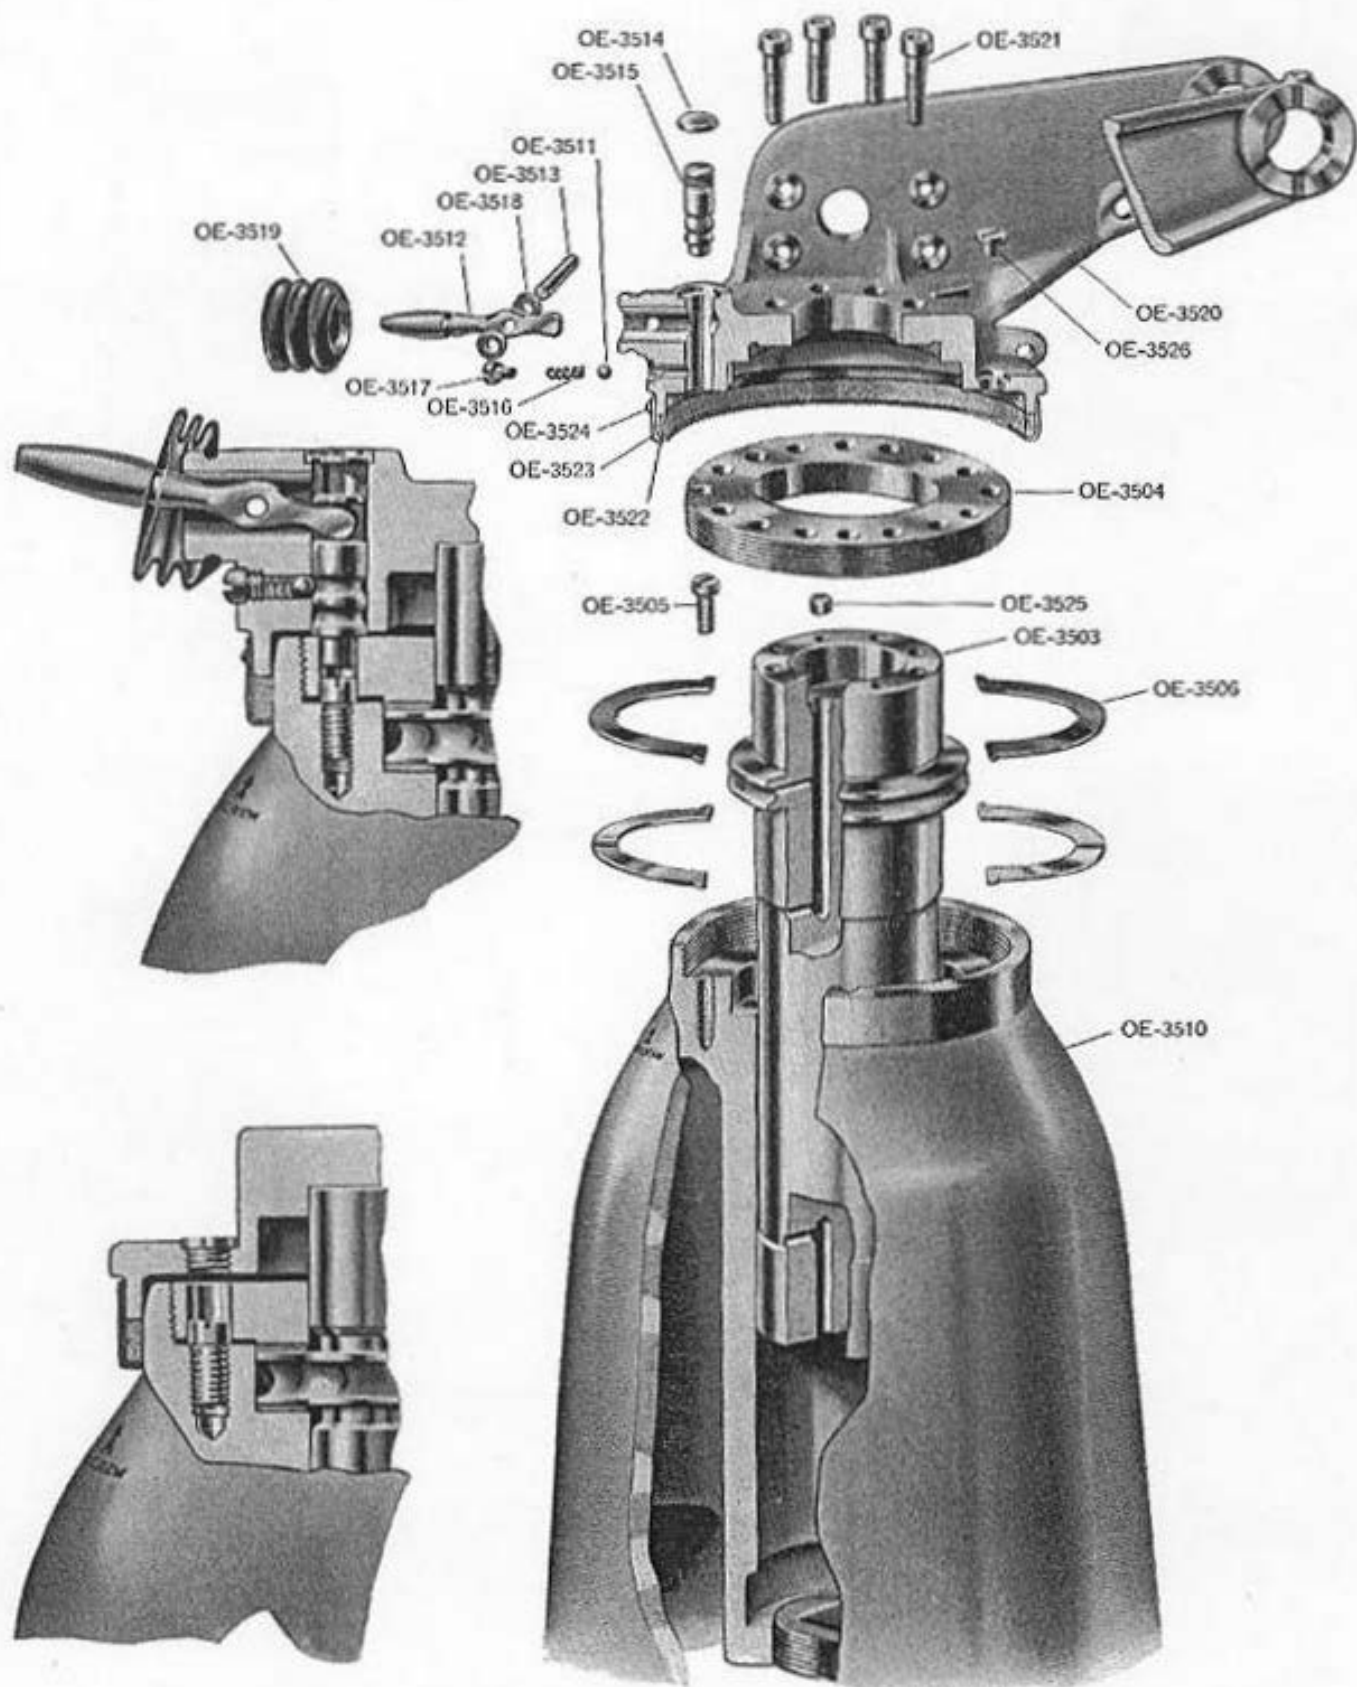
Exploded cut-away view of Mark 5 Mod. 3 Mount.
